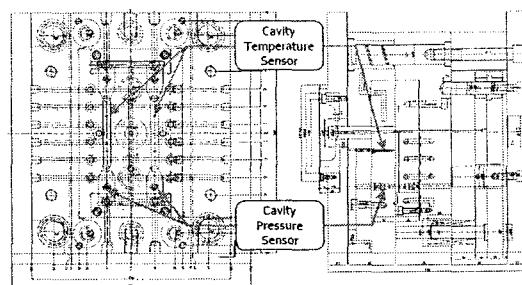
Assembly drawings for designed mold and mold-base of tensile test specimen with pressure / temperature sensors
